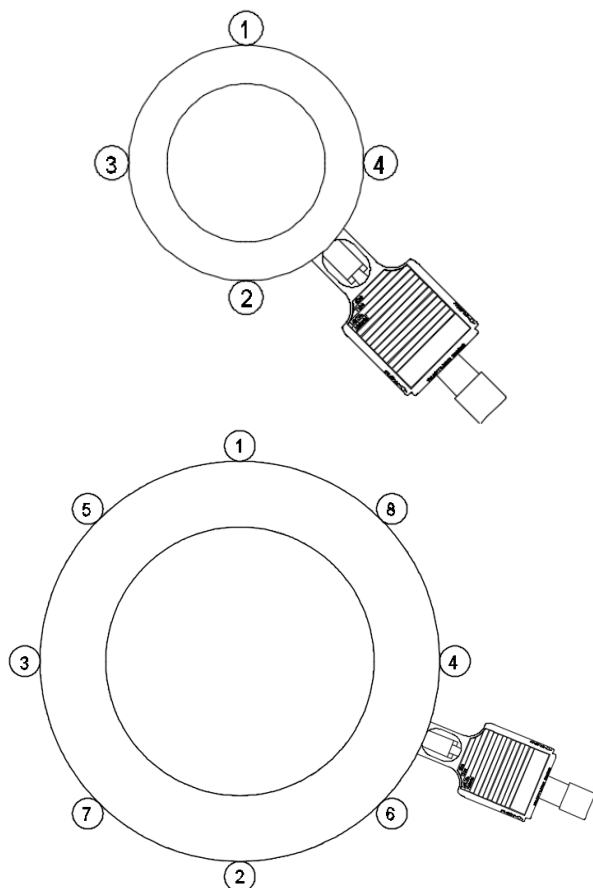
Recommended Torque Pattern with Integrated Burst Indicator
